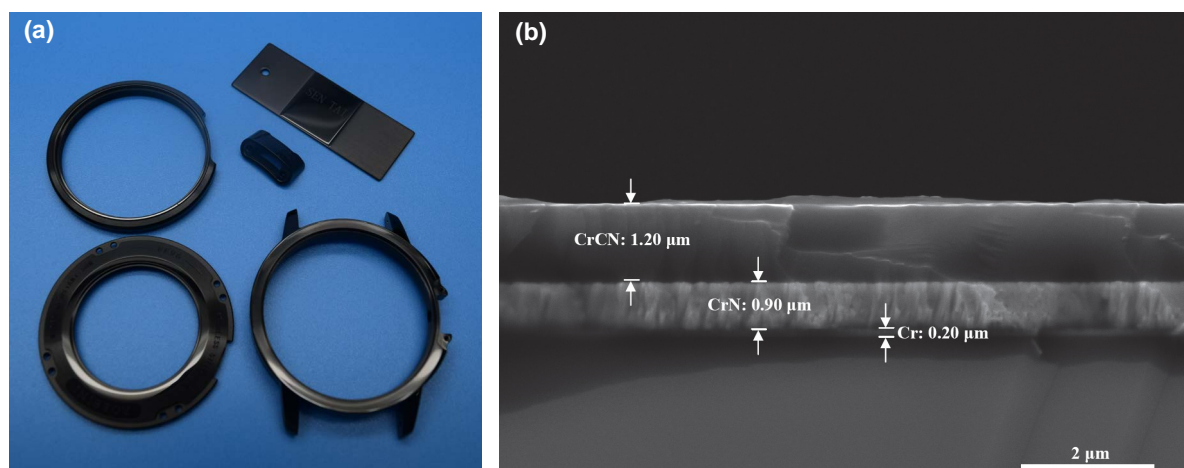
The pictures of samples coating with Cr-CrN-CrCN thin-film (a) 316L stainless steel watch cases and sheet coating with Cr-CrN-CrCN thin-film, (b) Cross-section morphology of Cr-CrN-CrCN thin-film for sample A on 316L stainless steel sheet
